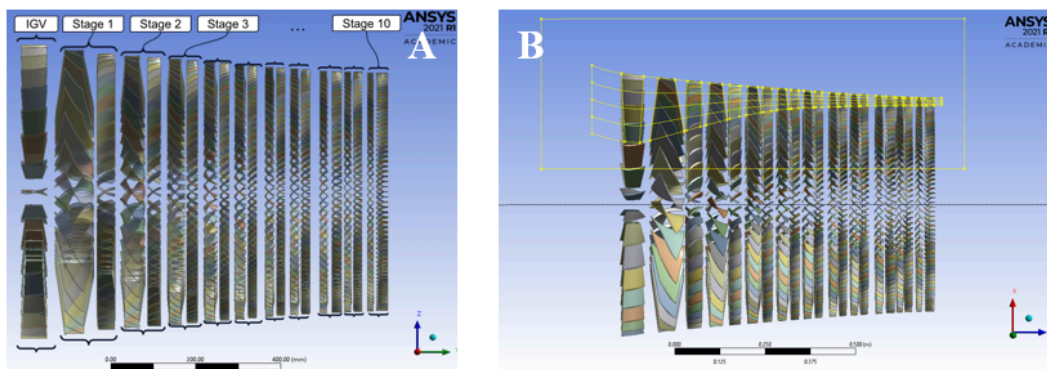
A Extracted 10-stage Compressor Geometry. B Flowpath Implementation on Compressor.
